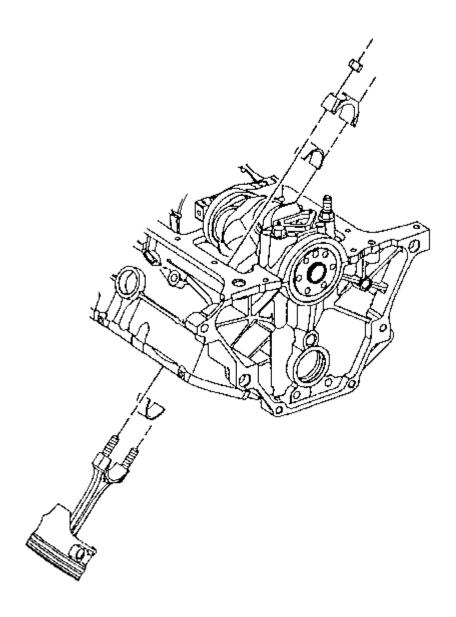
Removing Connecting Rod & Piston Assembly Courtesy of GENERAL MOTORS CORP.
